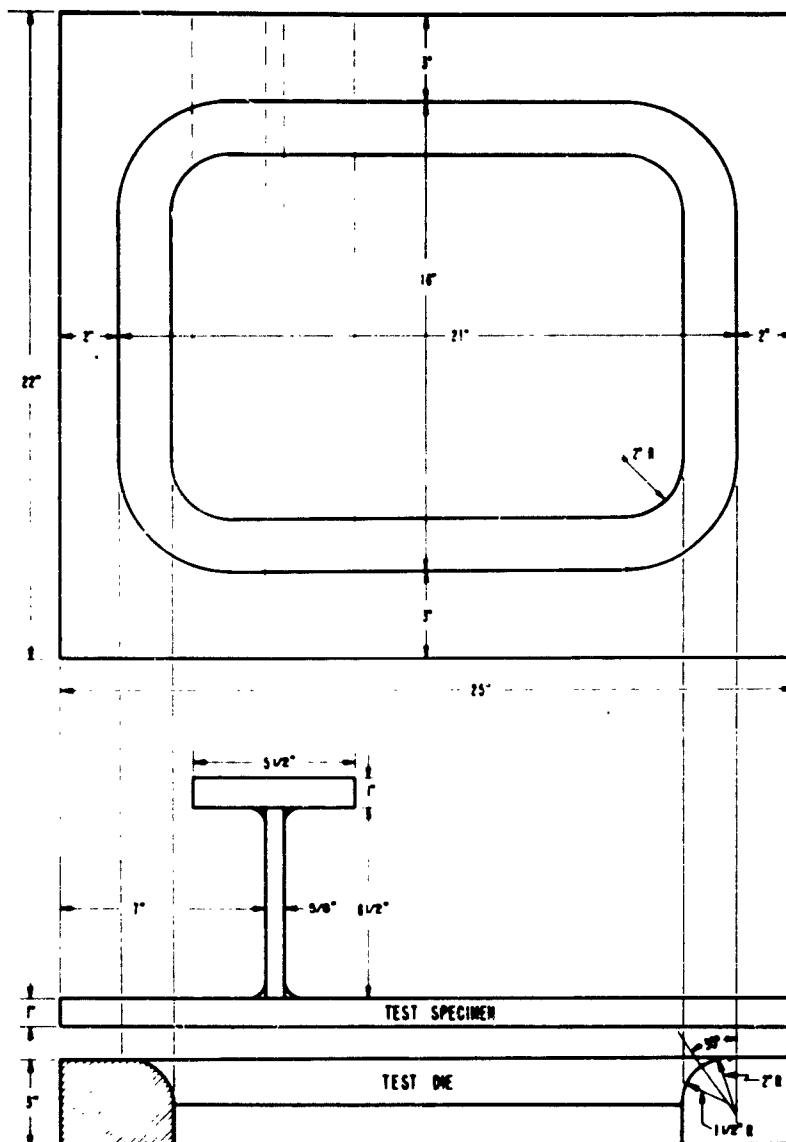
Modified explosion test specimen and test die designed to produce greater distribution of strain over weld joint. Note diminished support of die beneath tee web.
